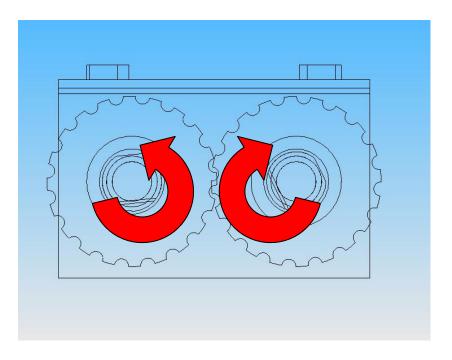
The direction of pinion gears movement when the converting process happens.
